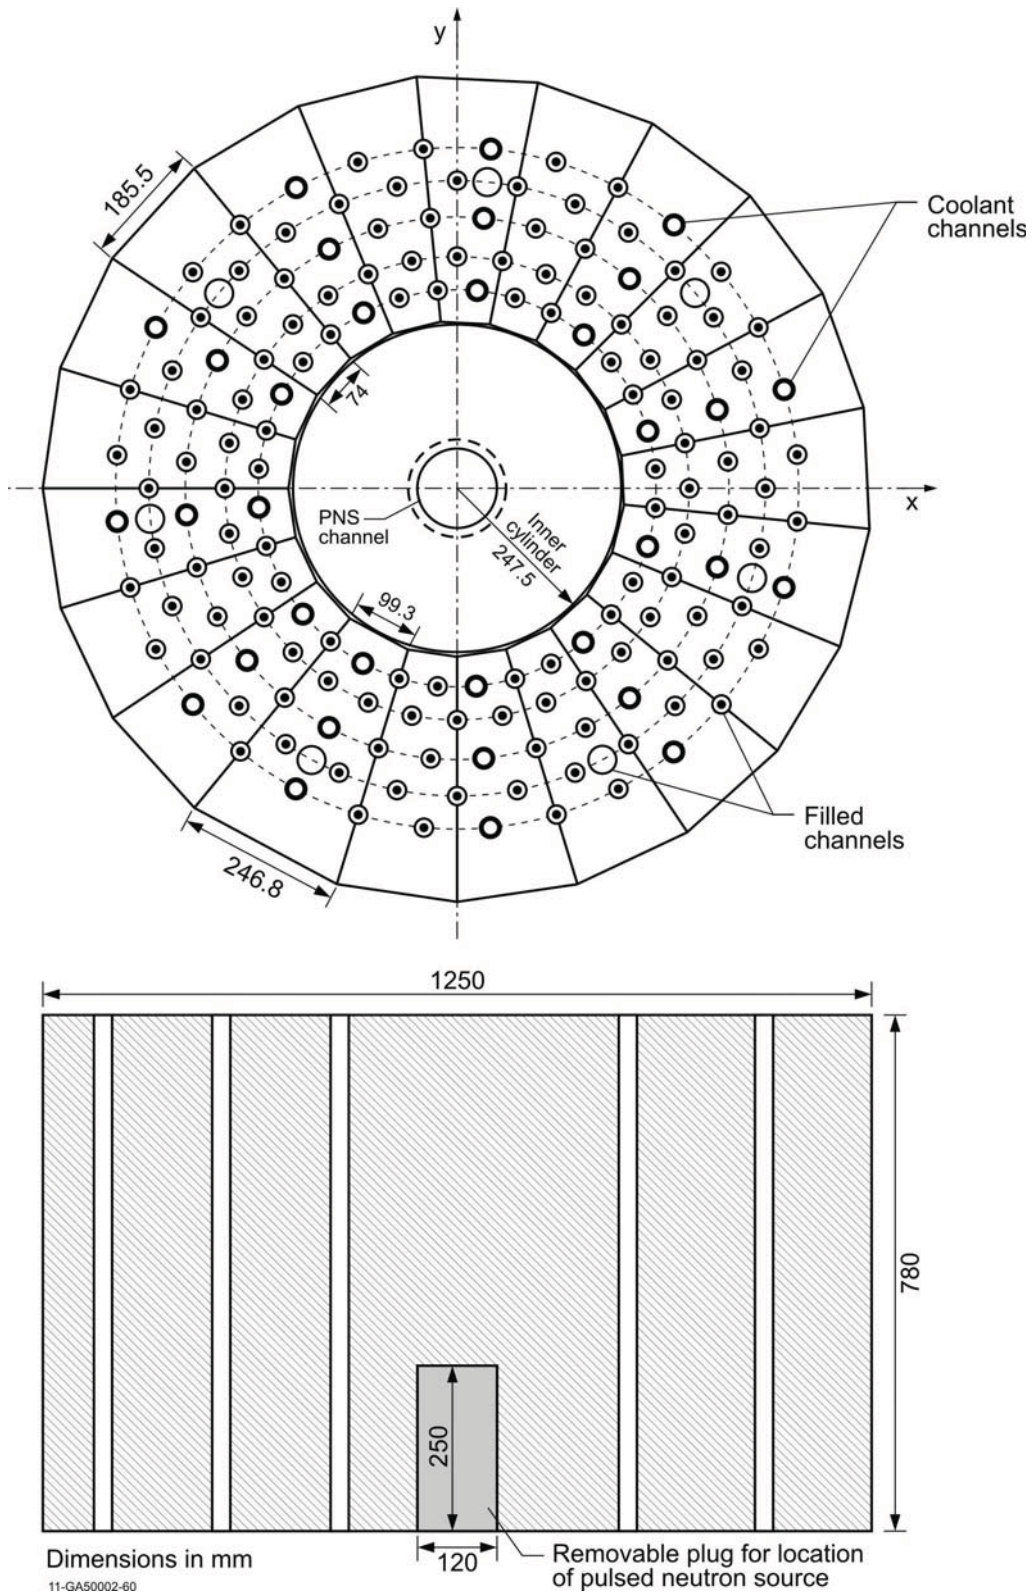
Details of the lower axial reflector. Note the 33 coolant channels, the small air gap between outer and inner parts, and the position of the pulsed source channel (Ref. 2).
